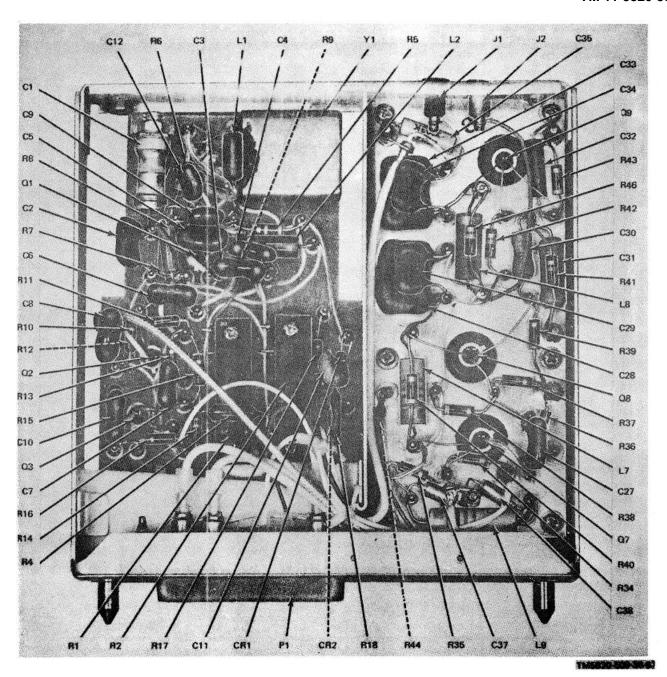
Radio Frequency Oscillator O-1032/PRC-47 (A8A6), Side View, Cover Removed, Card Assemblies E1 and E2.
